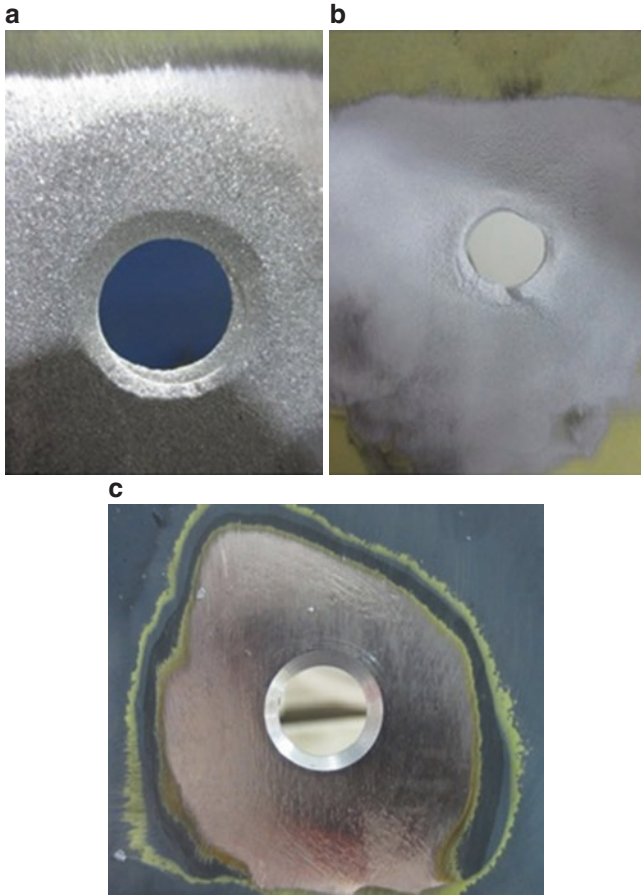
(a) Fastener hole grit blasted prior to cold spray, (b) after cold spray repair, and (c) after final machining with all original dimensions restored
